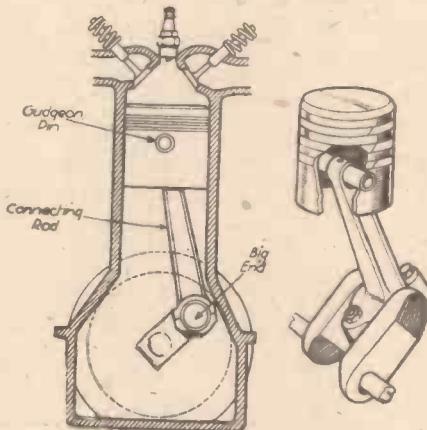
Connecting rod and crank assembly of an automobile engine.
